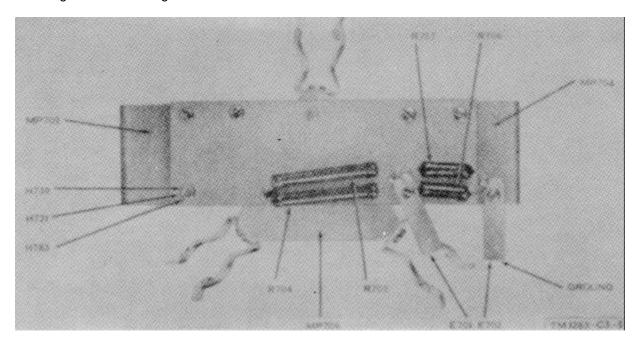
Dummy Load TS-234B/UP, clip mount assembly.
